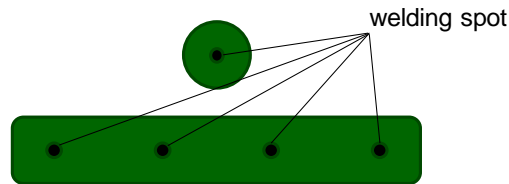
Single (above) und multiple (below) welding patch.
